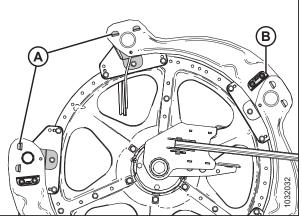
Reel Endshield Removed – Outboard Tail End
